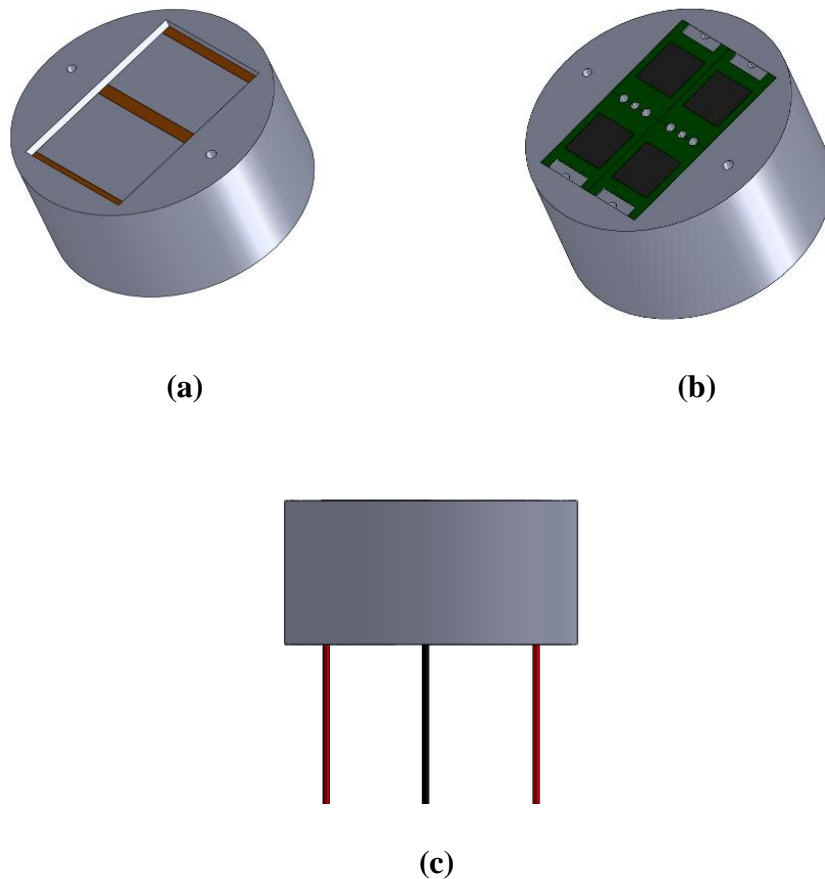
CAD drawing of the thick film resistive heater element developed and used in the present study. (a) Ceramic base with copper power leads. (b) Ceramic base with thick film resistors mounted in place. (c) Side view of the full assembly with the electrical wires.
